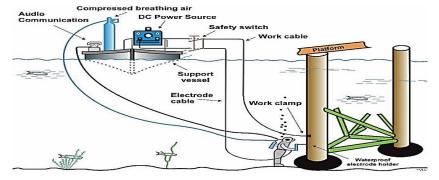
Underwater Welding Equipment and Underwater Welding Construction [11]
